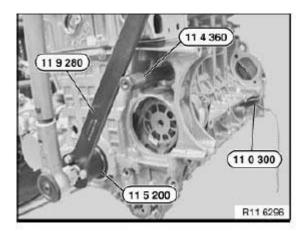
Identifying Special Tools Courtesy of BMW OF NORTH AMERICA, INC.
